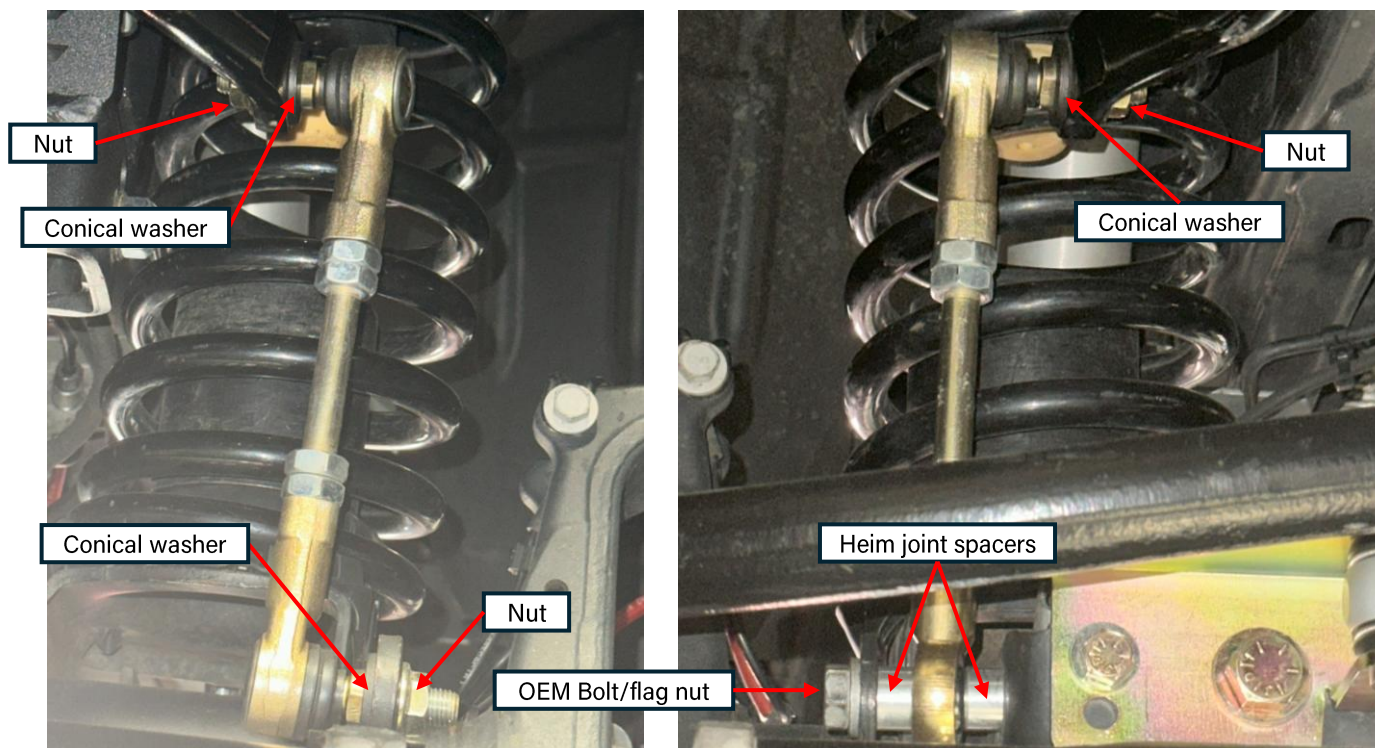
Front driver-side and passenger side sway bar end link proper orientation
